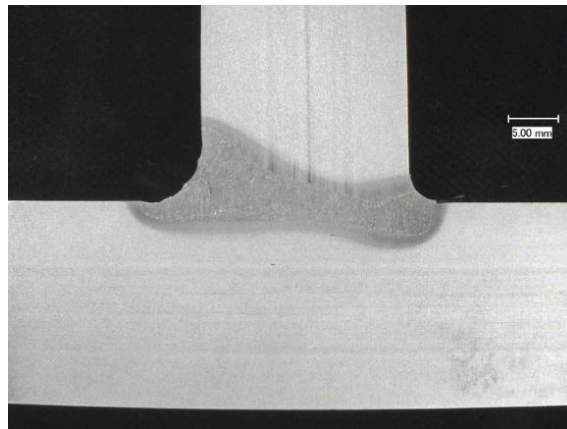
Plate thickness 20 mm; beam power 50 kW; welding travel speed 1 m/min
